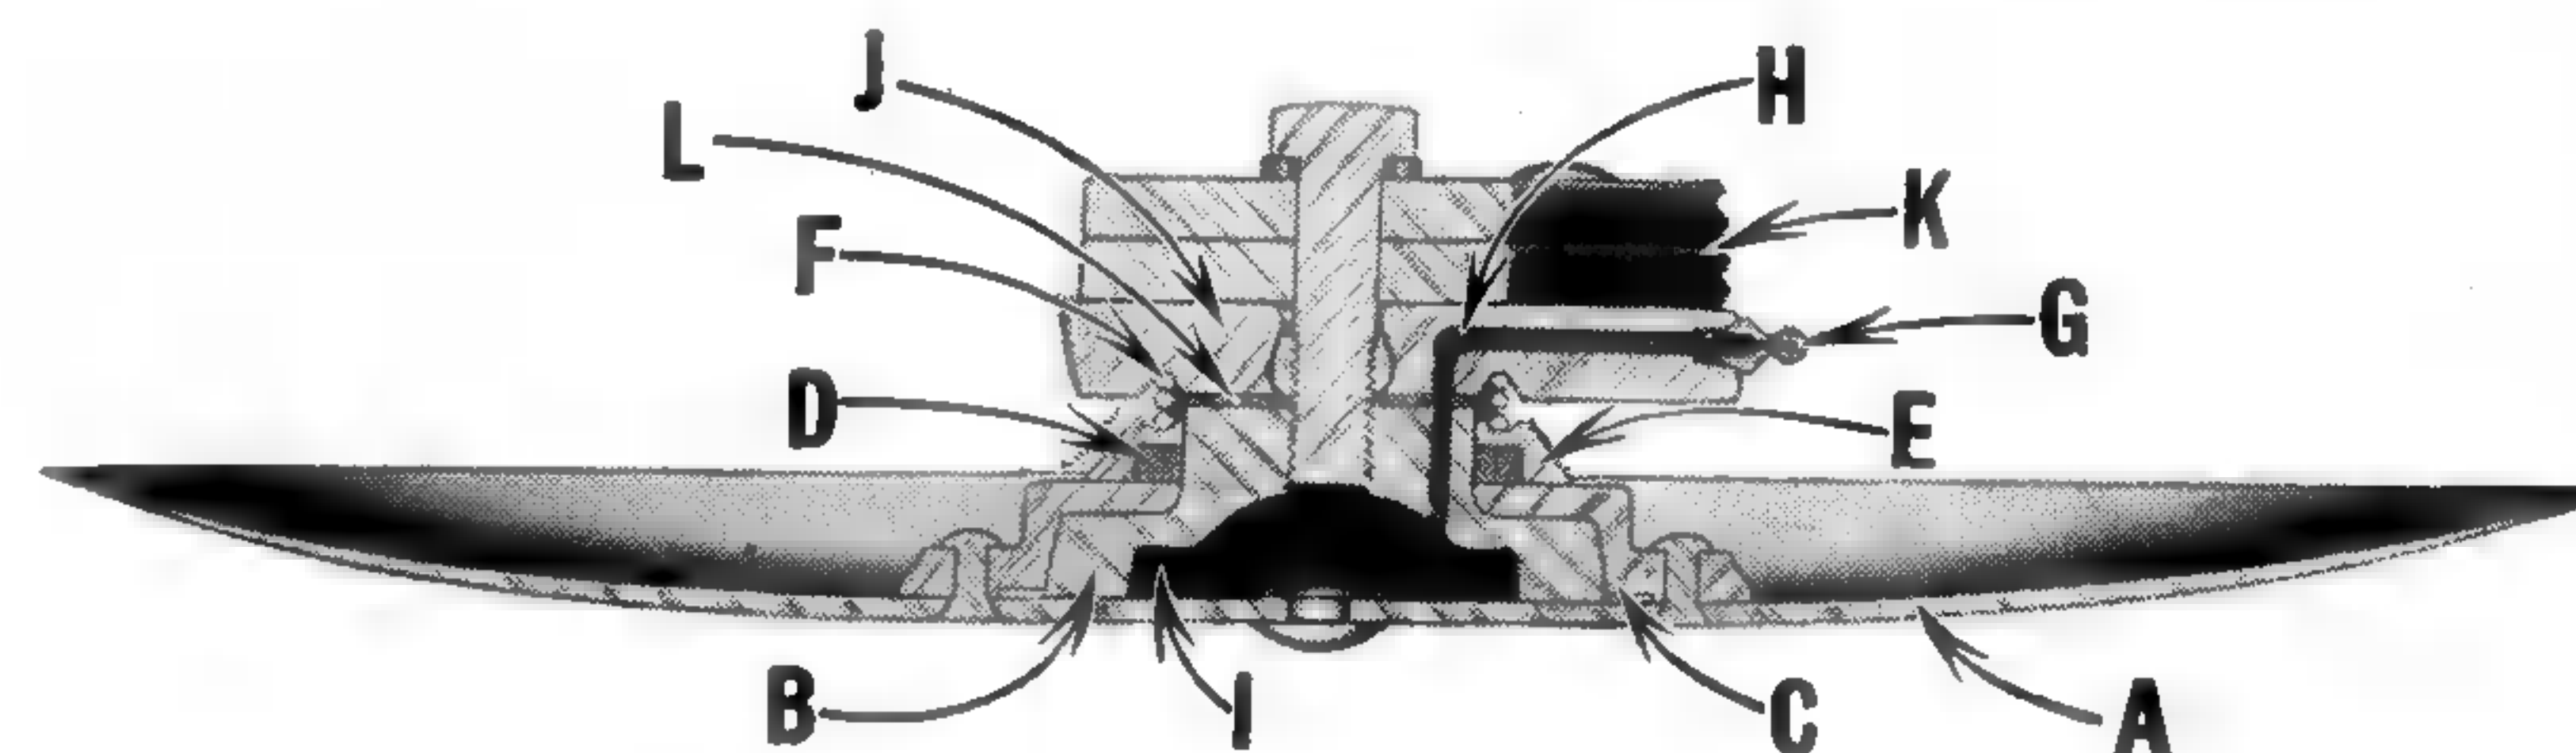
Cross-section of drill disk showing "A," disk blade; "B," disk bearing; "C," bearing case; "D," felt washer; "E," hard-iron dust cap; "F," dust cap spring; "G," Alemitte fitting; "H," oil passage; "I," oil reservoir; "J," disk boot casting; "K," drawbar; "L," gasket.
